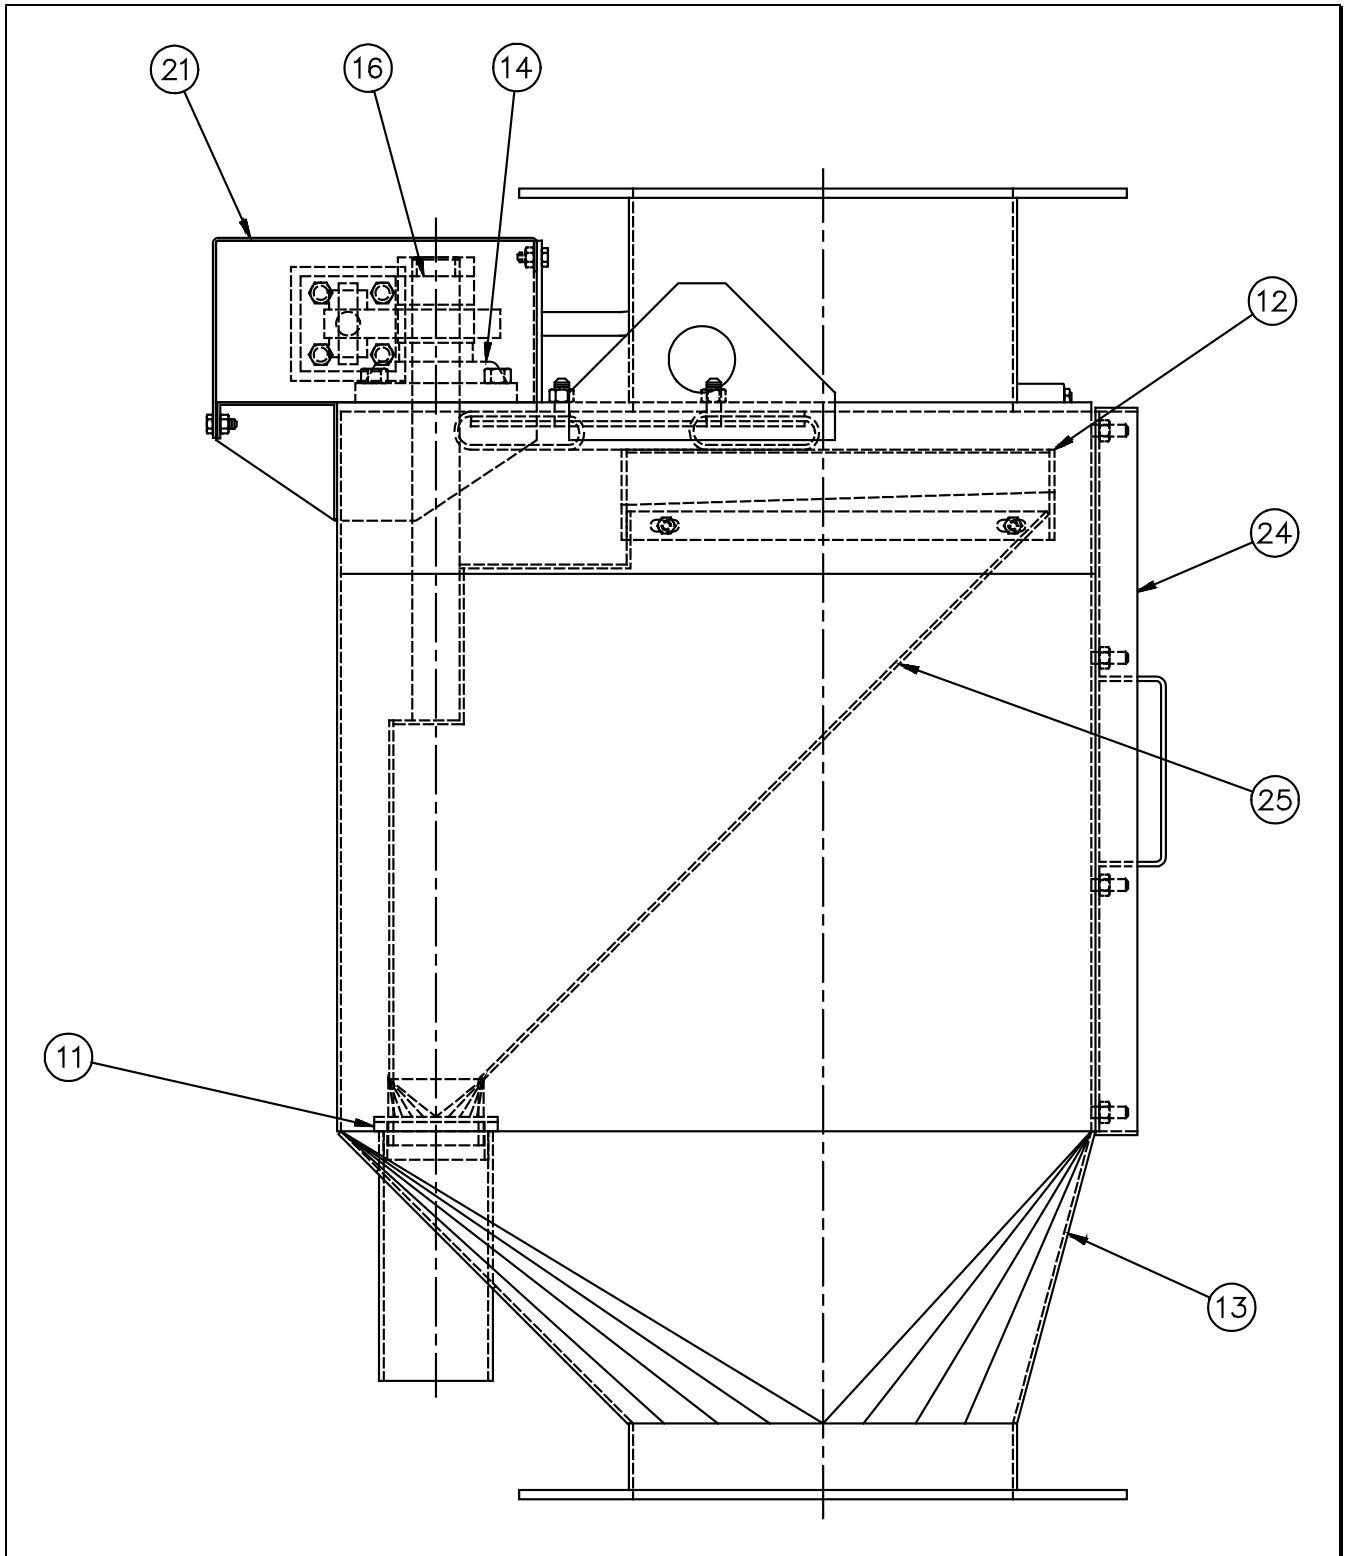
, GRA SAMPLER PARTS DRAWING
